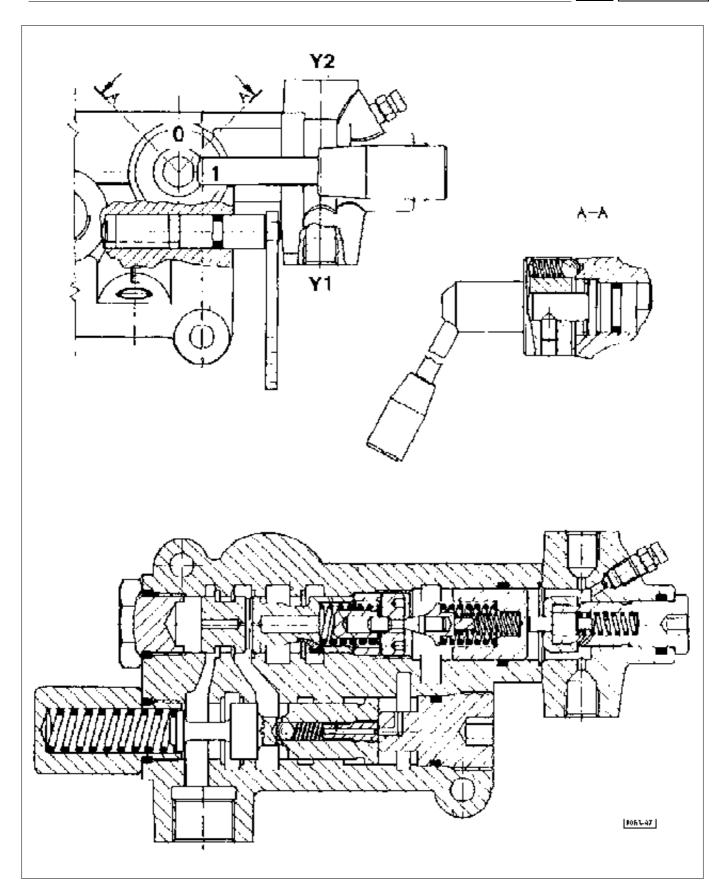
Section through brake control valve for trailer equipped with safety brake (ITALY version).
